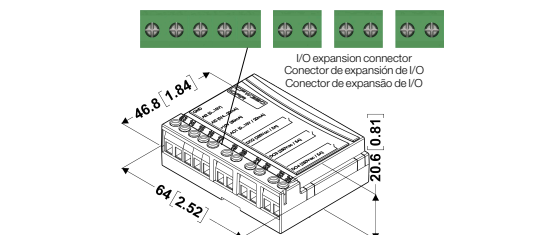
Accessory dimensions in mm [in] and connectors location
